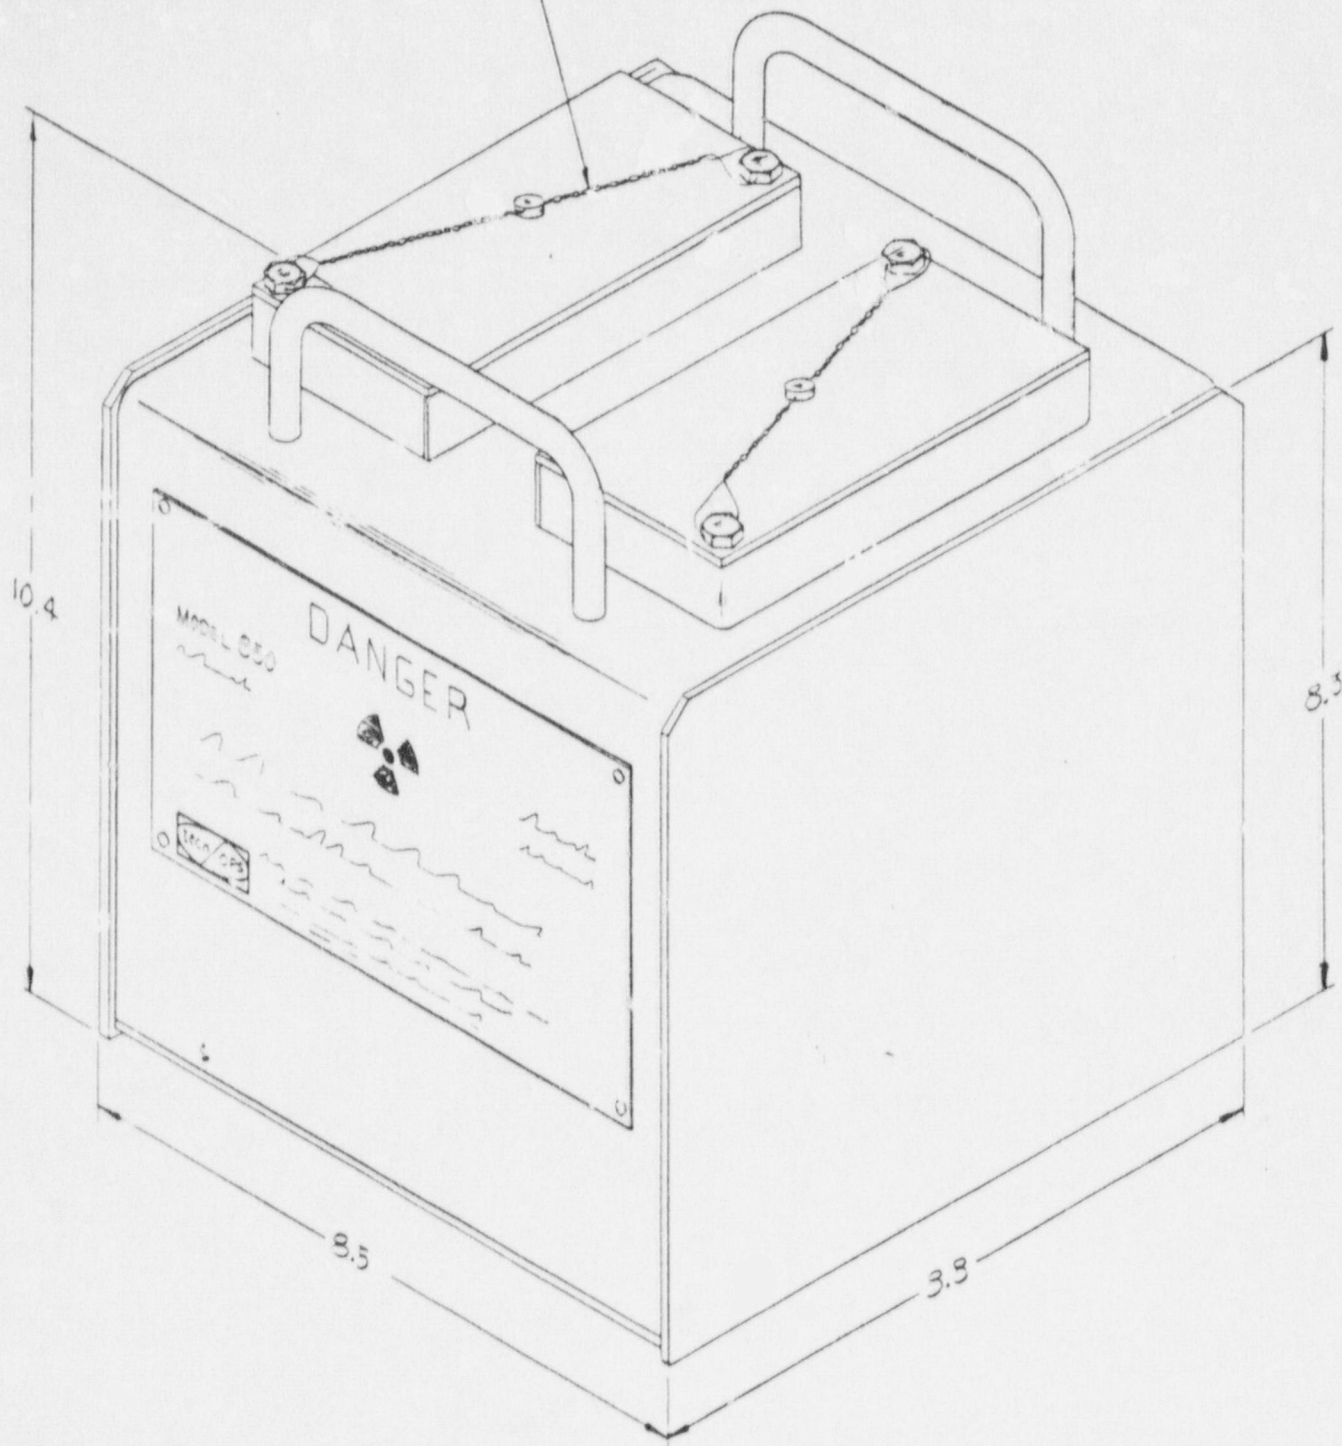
Sheets 1 - 5 Descriptive Assembly
